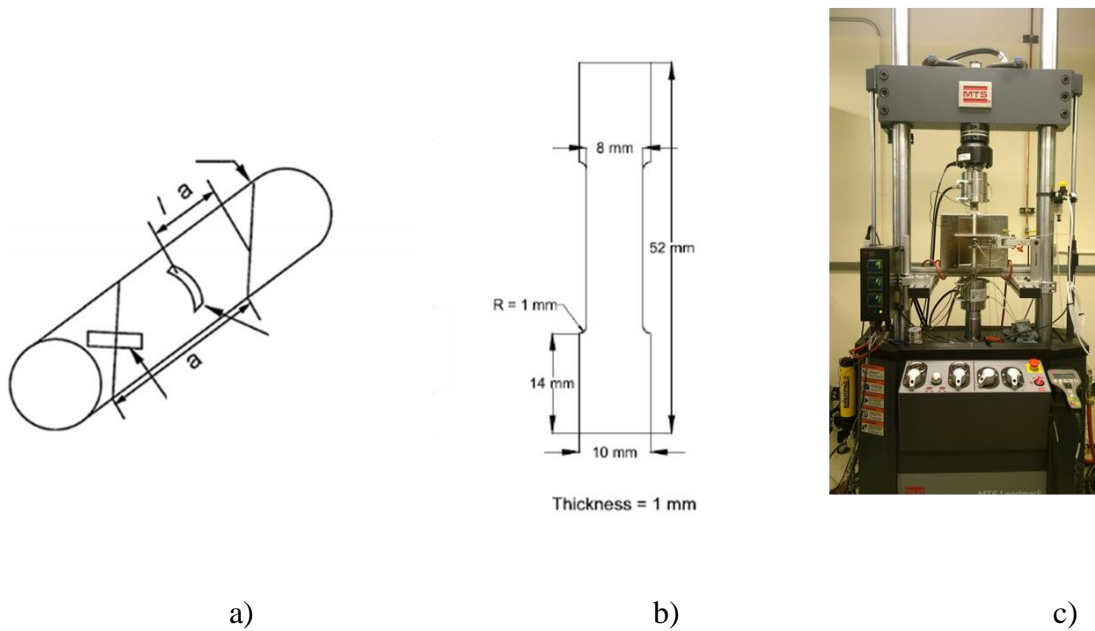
a) Orientation of flat strip tensile specimen within the pipe sample (Hashemi 2011), b) Dimensions of flat strip tensile specimen c) Servo Hydraulic MTS machine
